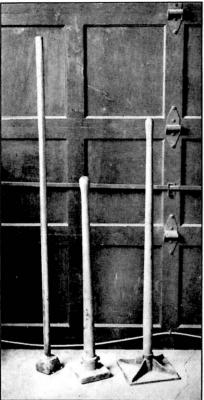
FLOOR RAMMERS FOR MAKING FLOORS.
